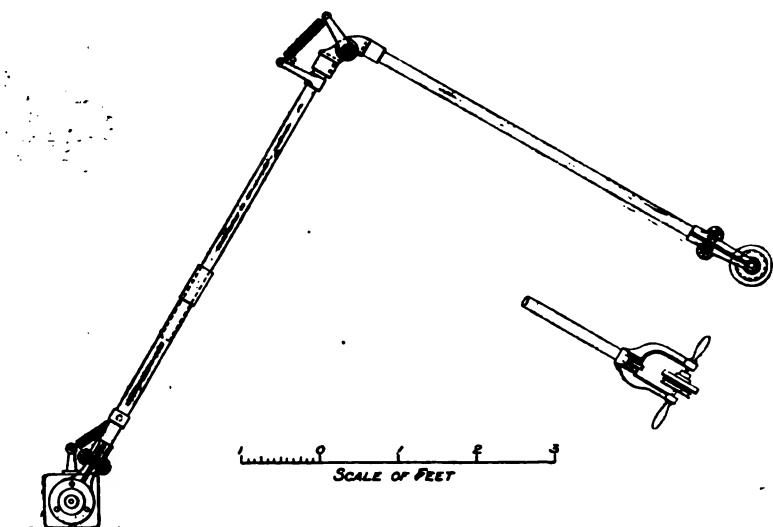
Portable Electric Grinder, for dressing seams and rows of rivets in plate-work, Motor on floor driving wheel by twisted leather belt inside tubes.
